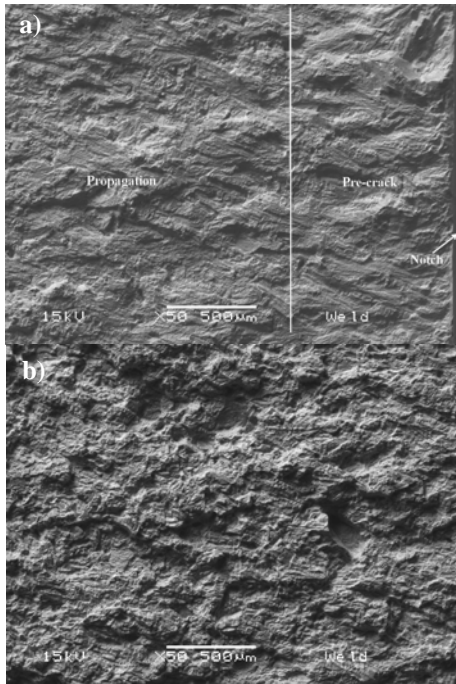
Details of weld metal surface fracture, a) pre-crack and propagation and b) failure.
